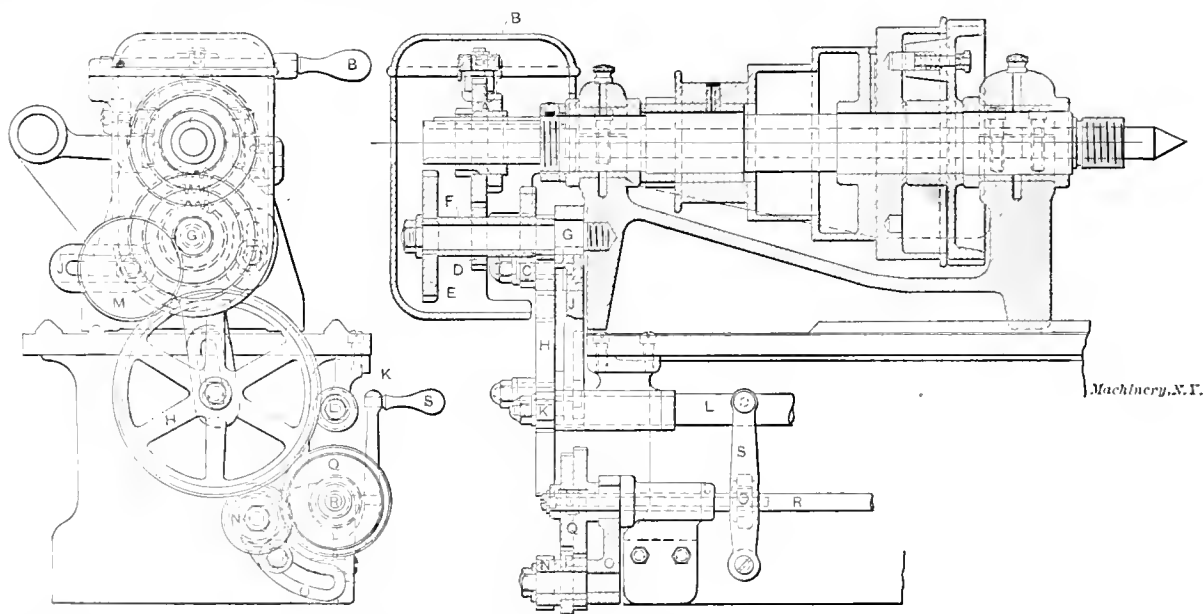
End View and Section through Head-stock, showing Feed Connections.
